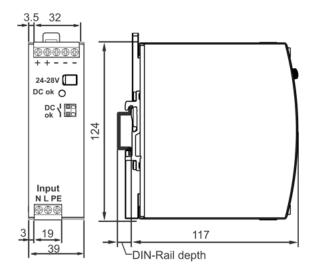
Front/side view PS2001-2410-0000, all specifications in mm
